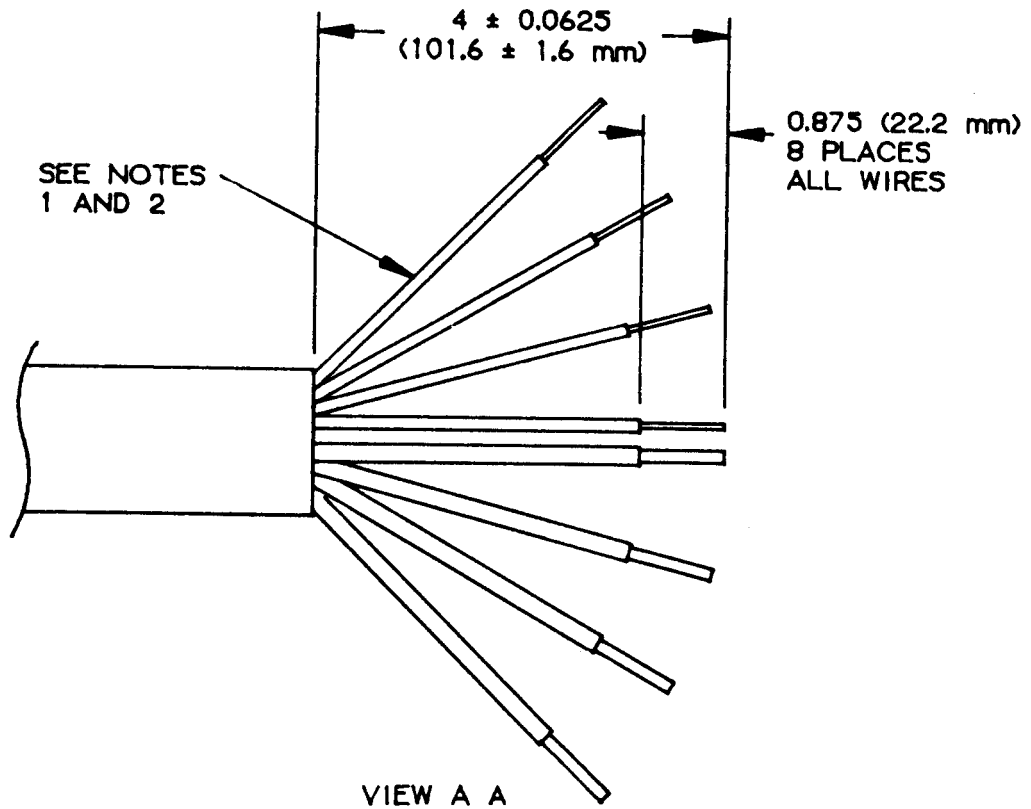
20-amp output connector assembly. (sheet 2 of 2)
